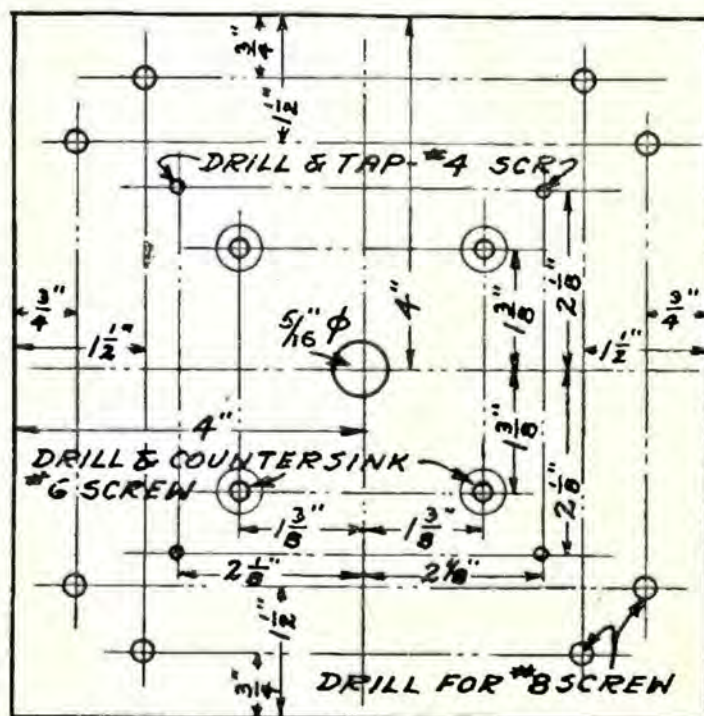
A—Showing the drillings in the 8"x8"x3-16" panel.
